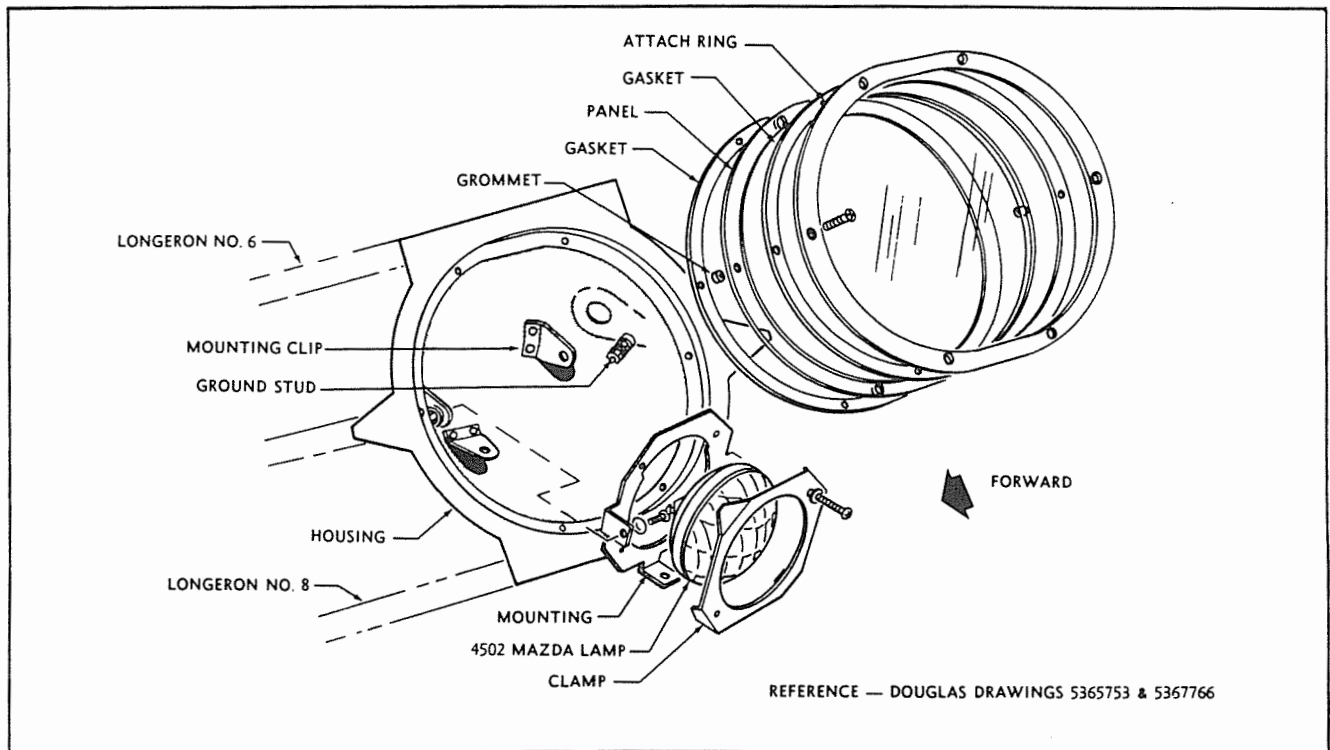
Wing Leading Edge Illumination Light Assembly
